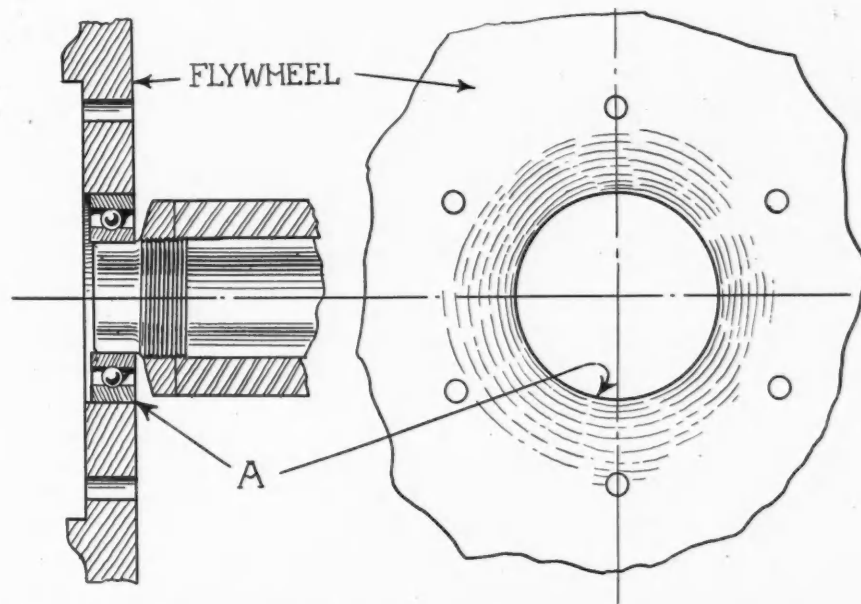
The fit of the clutch pilot bearing into the flywheel recess A is very important and the recess in the flywheel must be held concentric to .004 in.
